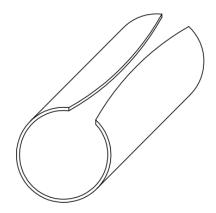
When desired dimension is obtained, calibrate the material, rotating once and more
